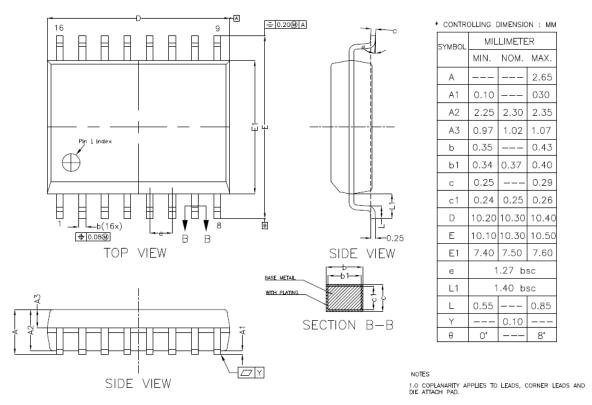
WB SOIC16 Package Shape and Dimension in millimeters and (inches)
